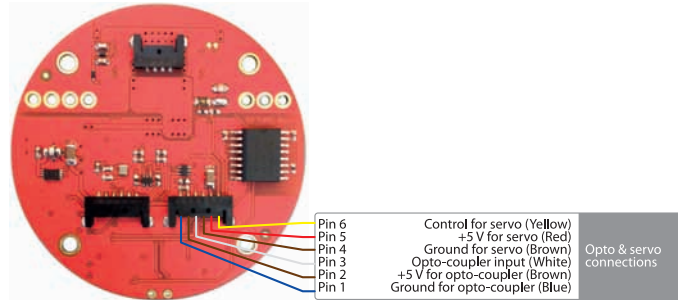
SF40 Controller PCB bottom: Servo connections
